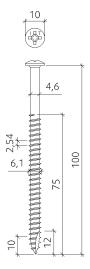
ISO-TAK HD – 6.1 Screw for fastening in concrete, steel- and timber decks
